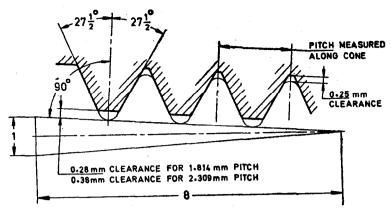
FORM OF THREAD FOR 15-24 mm GAUGE B AND 15-24 mm GAUGE F
